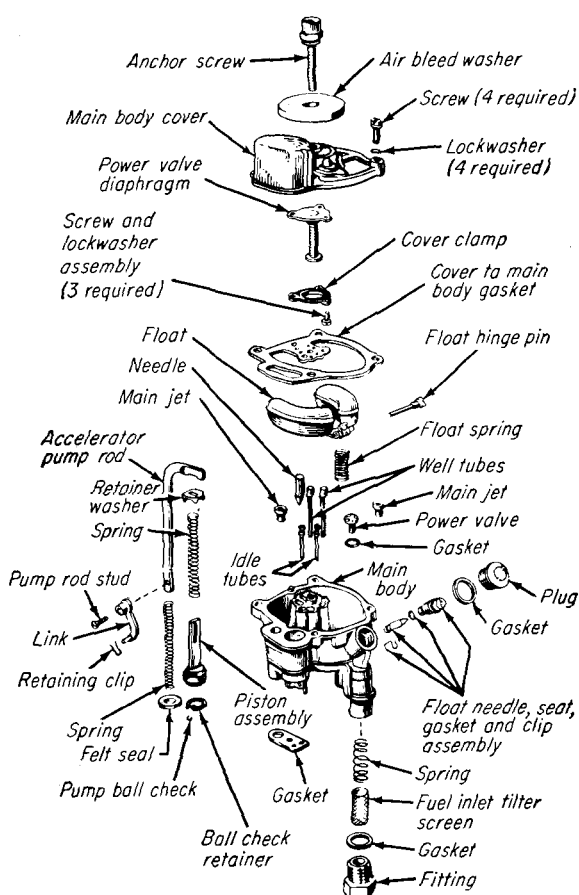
Main body disassembled. (Ford Motor Company)
